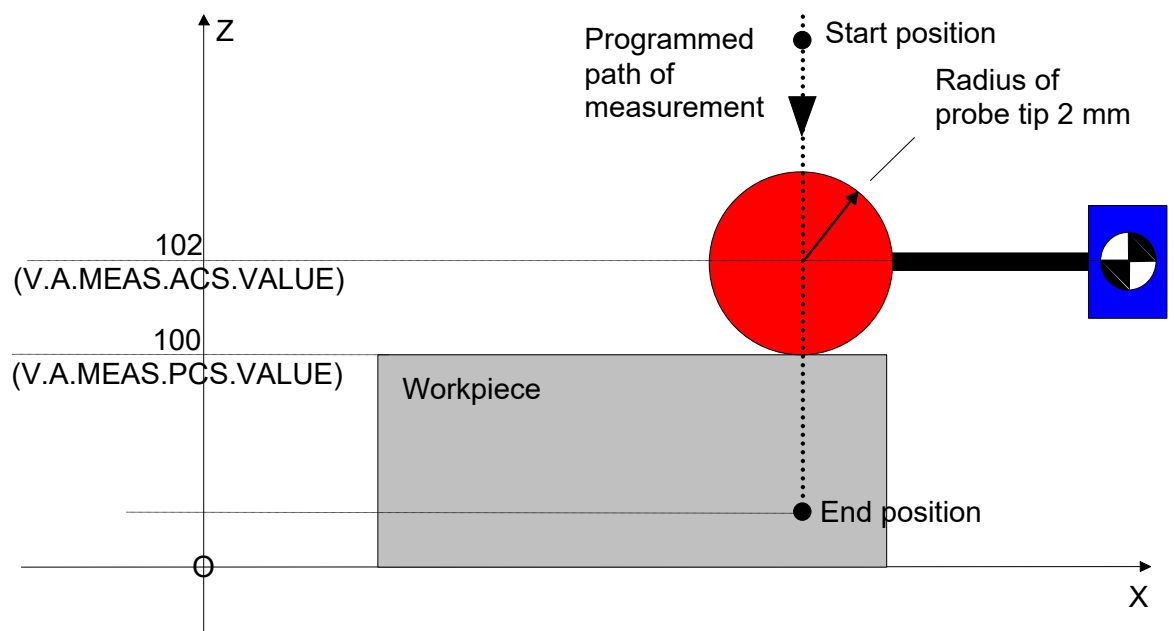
Measuring with a measuring probe tool of 2mm radius
